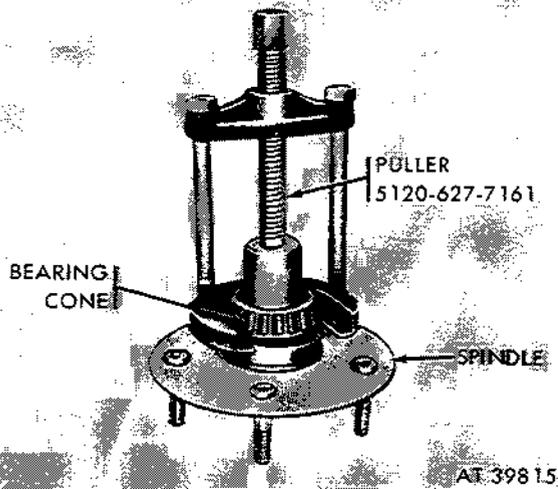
Remove outer bearing using puller 5120-627-7161.
